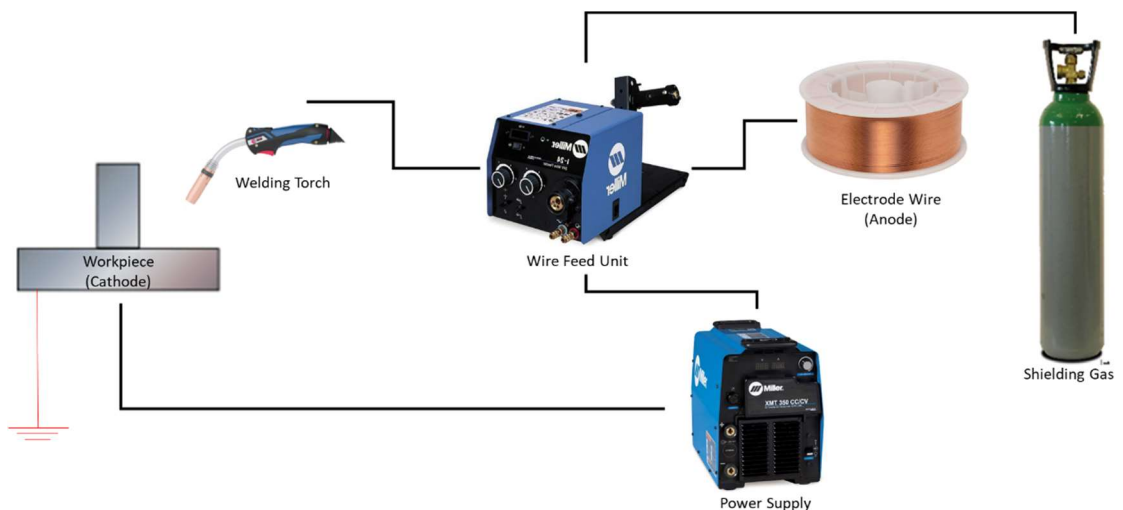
Gas Metal Arc Welding (GMAW) set up [1.1]
